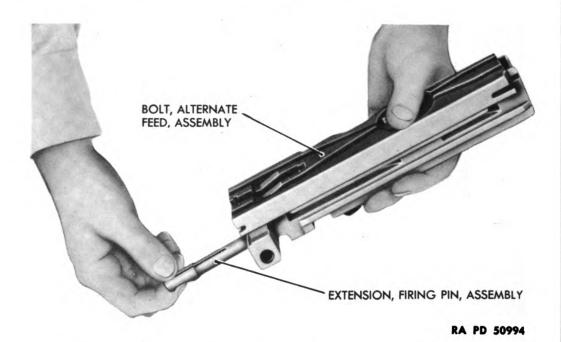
Removing Firing Pin Extension Assembly With Firing Pin Attached
